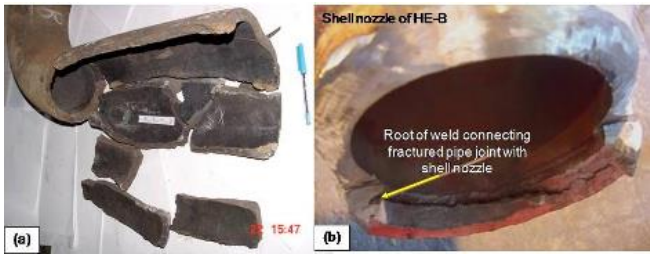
(a). Enlarged view of the fracture zone on the heat exchanger B side showing thick wall rupture and (b) close up view of the fracture surface of the shell nozzle of the heat exchanger B showing crack propagated from the circumferential weld root toward the outer surface.
